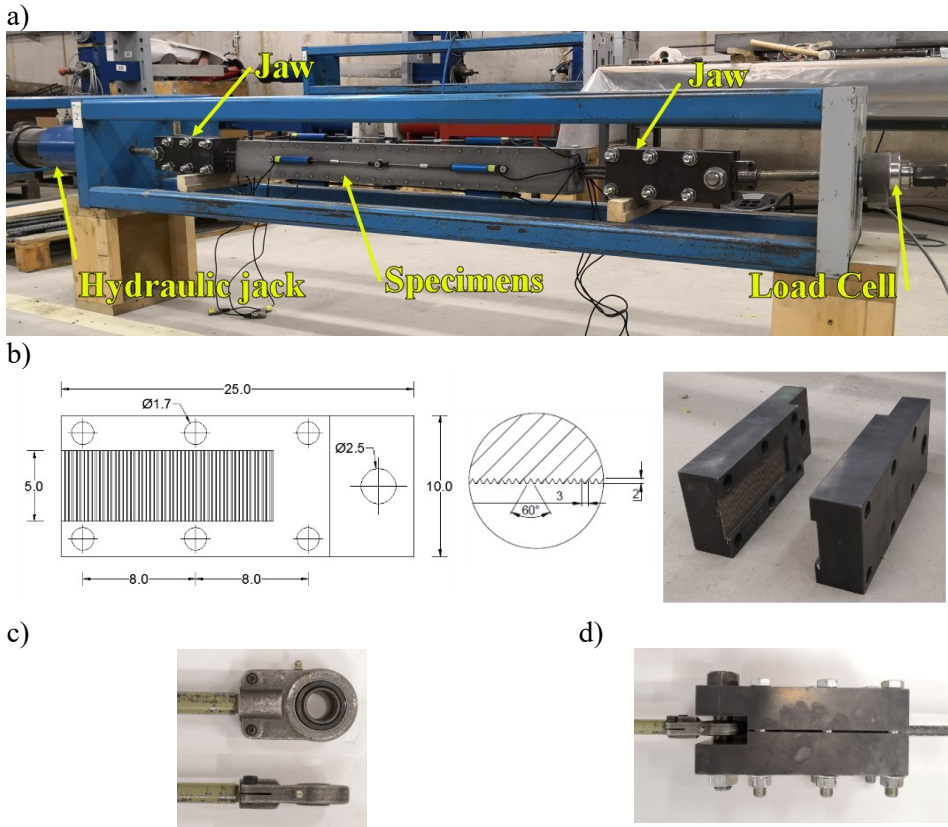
a) Tensile test equipment. b) Jaw details. c) Rod end bearing. d) Assembled jaw connection.
